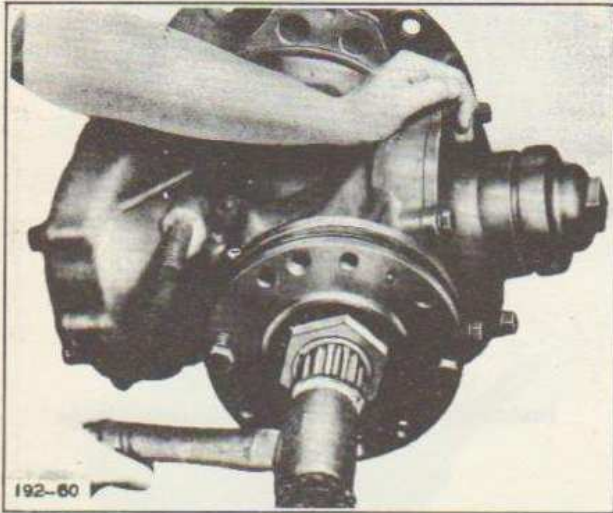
Placing 2nd Reduction Pinion Gear Sub-assembly in Housing
